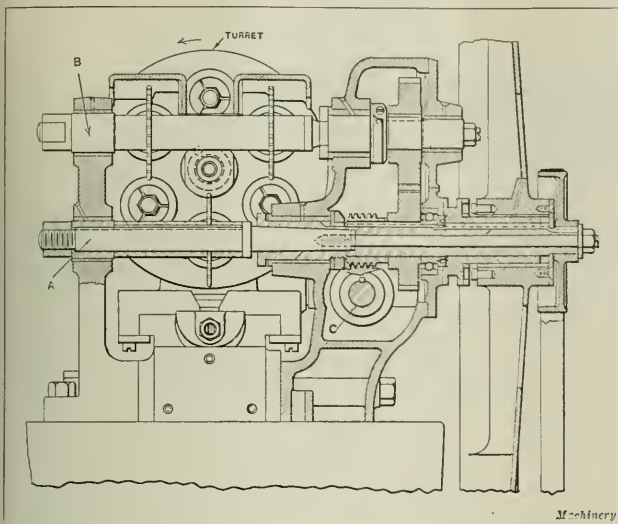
Cross-section showing Method of driving the Cutter-arbors and the Camshaft
